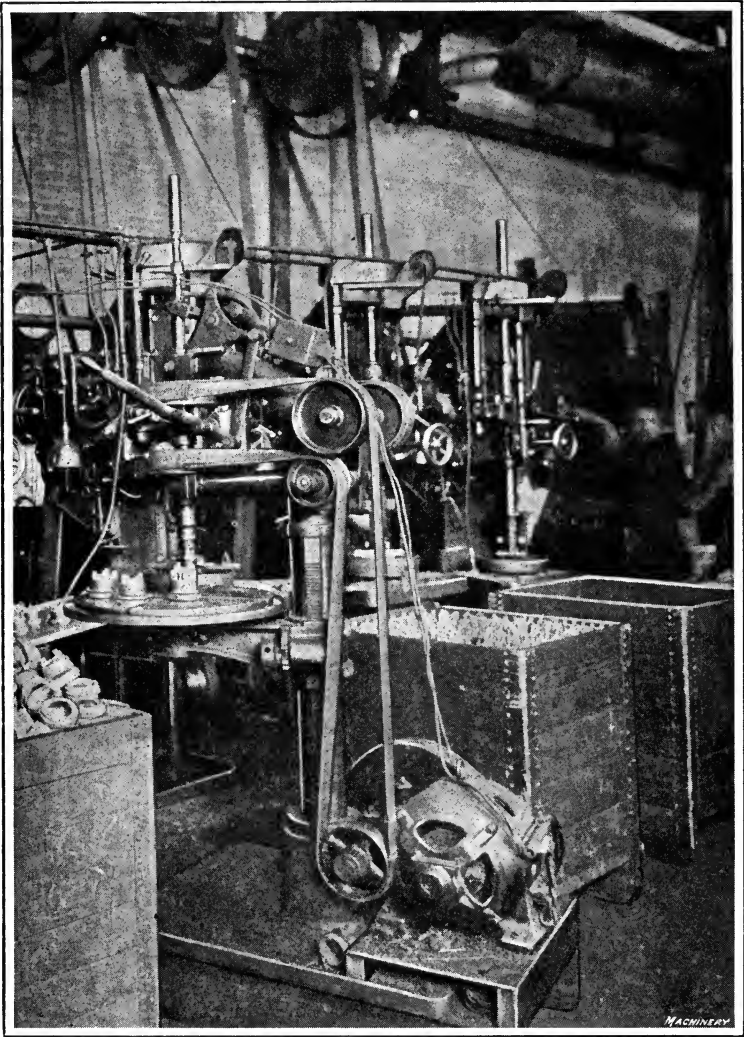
Tapping Machine mounted on Skid to be handled by Elevating Truck, and equipped with Individual Motor Drive
